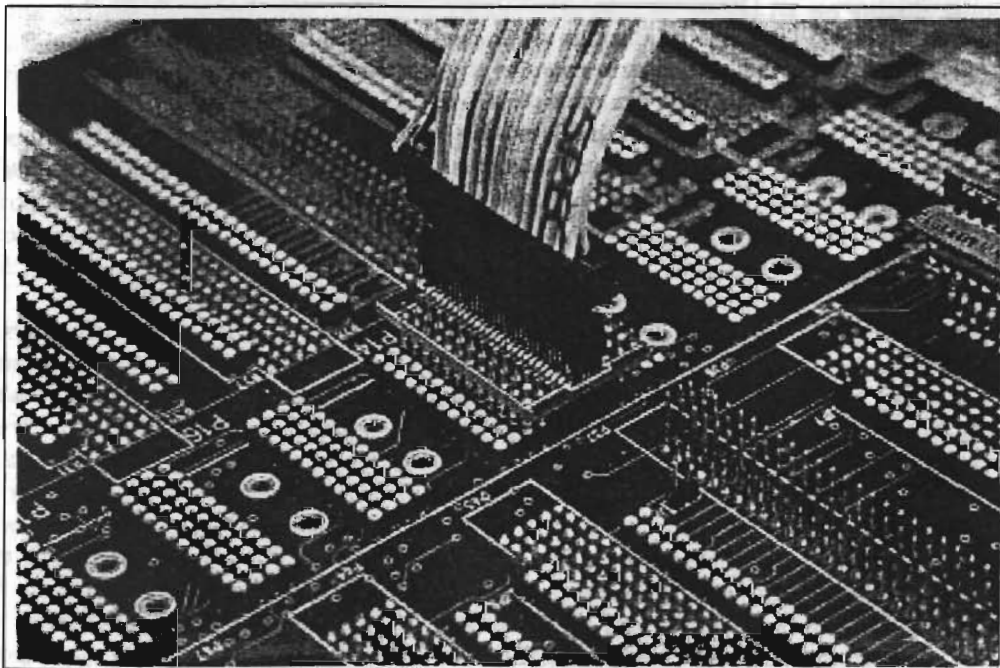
The MAC Backpanel Auxiliary Cards (SMT-to-DIP Type I)
